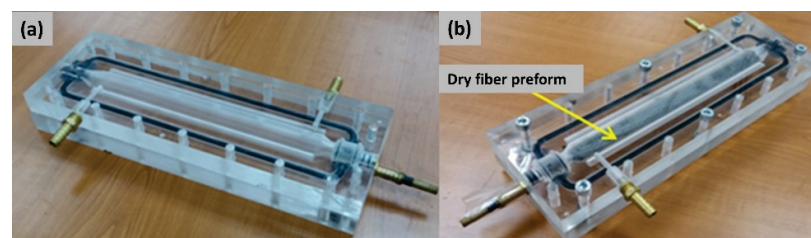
Acrylic mold prototype design for manufacturing a tubular section (a) mould without preform (b) mould with dry fabric preform.
